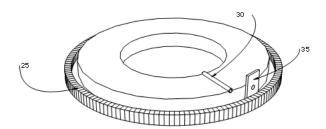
Cutaway drawing of Rielles Drive 3.0
